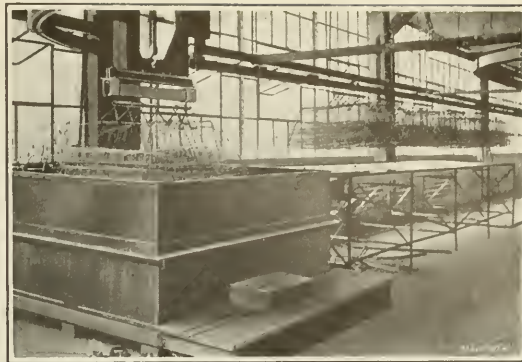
To provide for dipping assembled cushion springs into a japanning tank, the Detroit Wire Spring Co. arranged a section of trolley rail on a hoist so that the trolley could be run onto this section of the rail to enable the work held by it to be immersed in the japan. After dipping, the rail is raised so that the trolley can run off onto the main line
